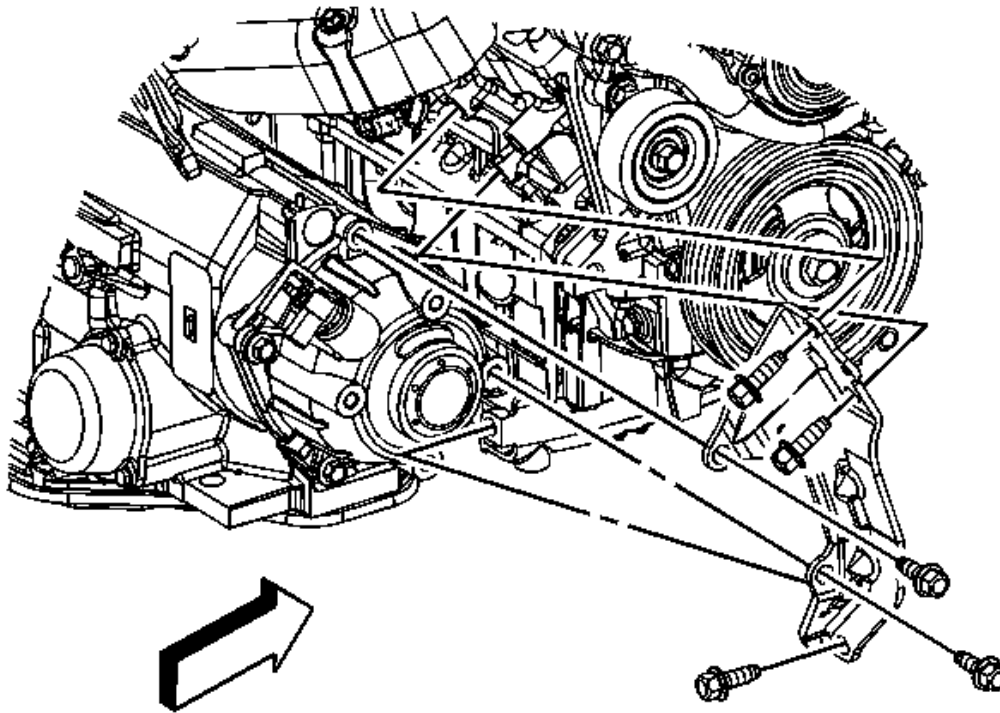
Locating Rear Transaxle Brace To Engine/Oil Pan Bolts
